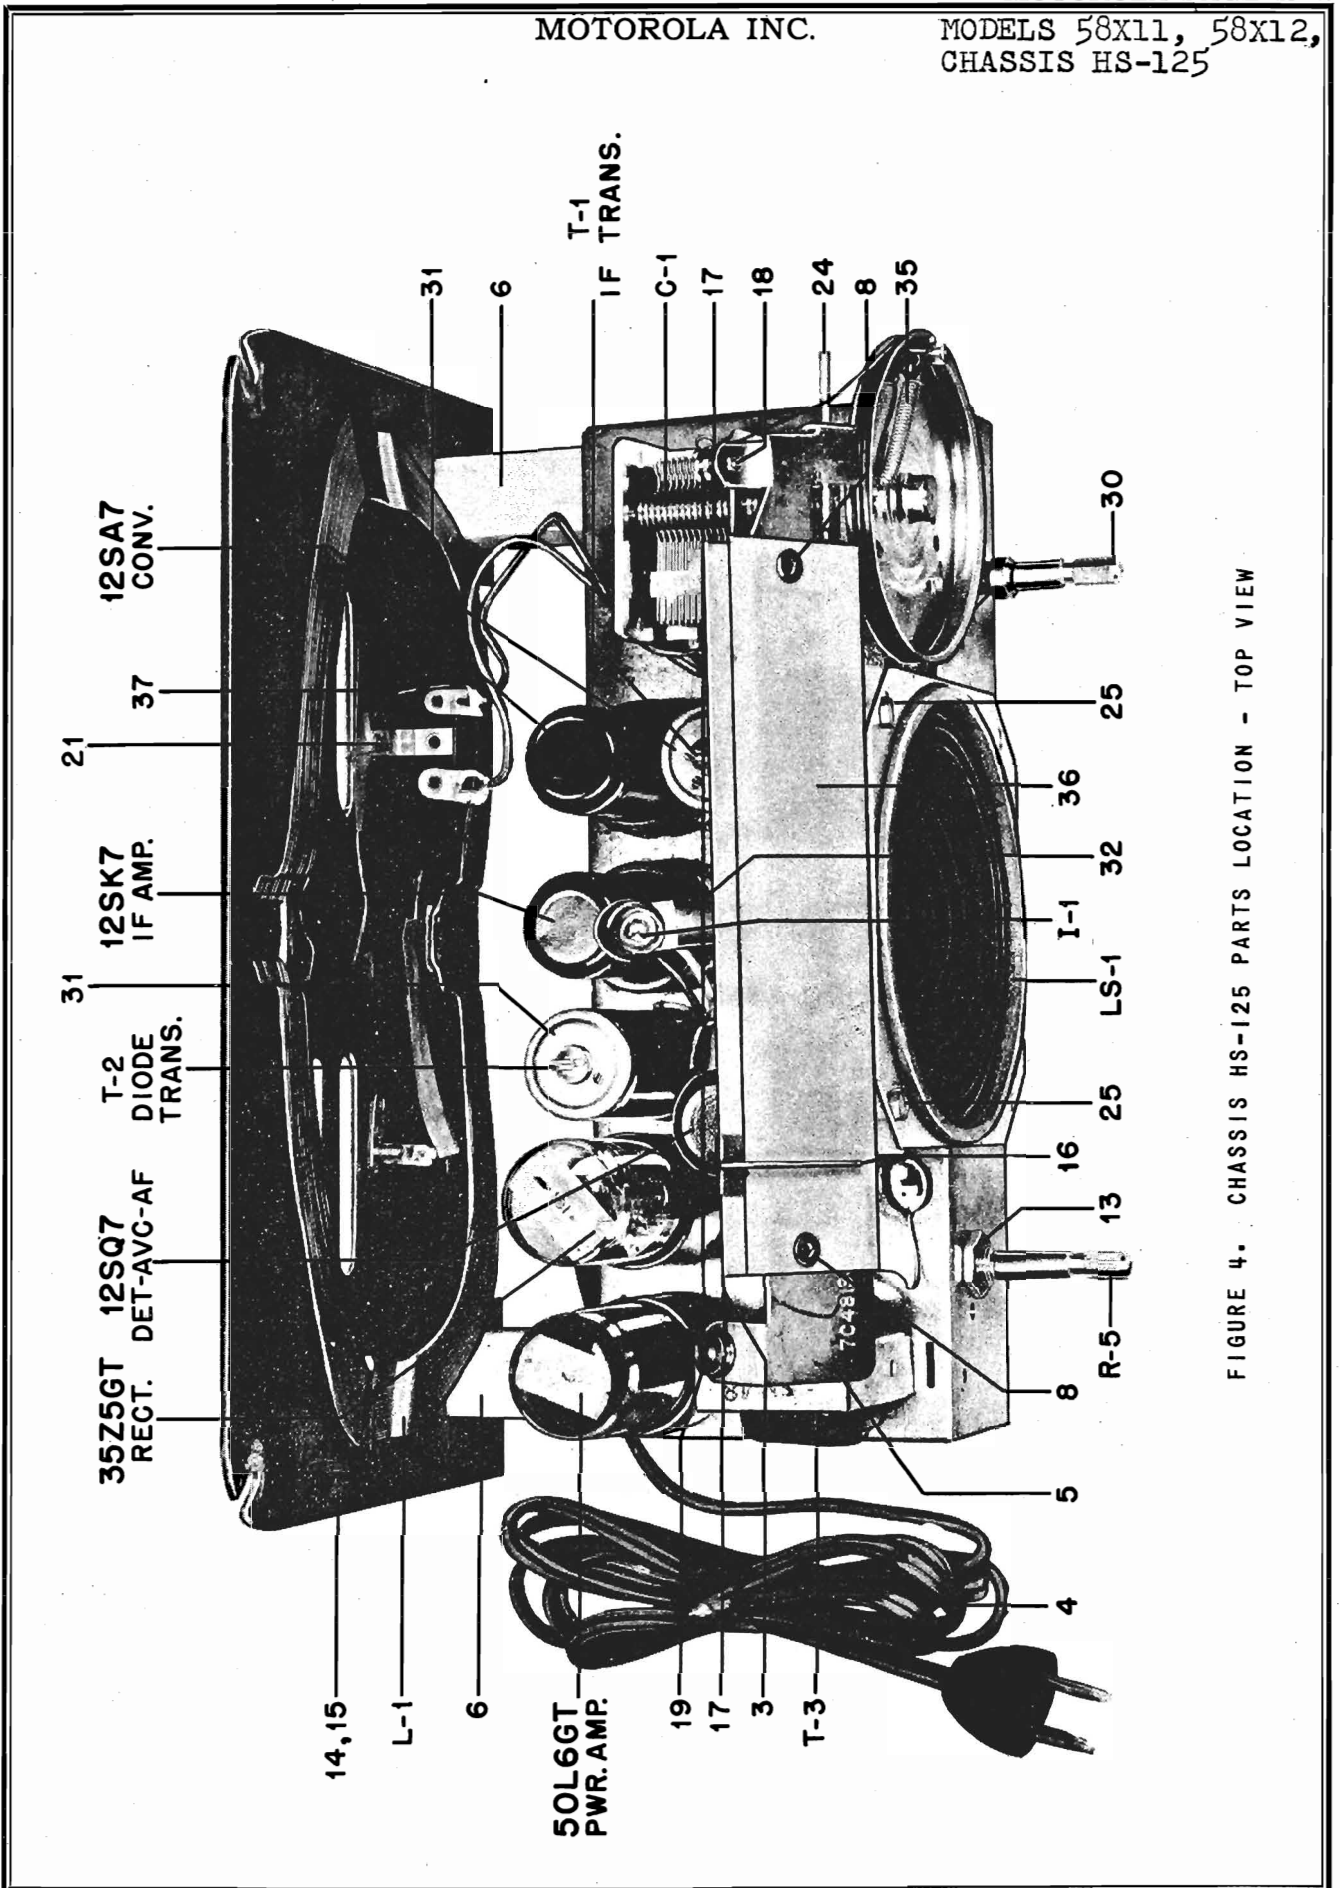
CHASSIS HS-125 PARTS LOCATION - TOP VIEW
